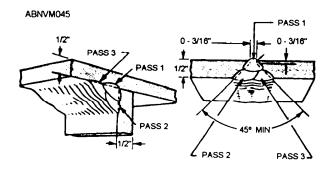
Joint design and weld pass sequence overhead-position multipass fillet and butt welds.
